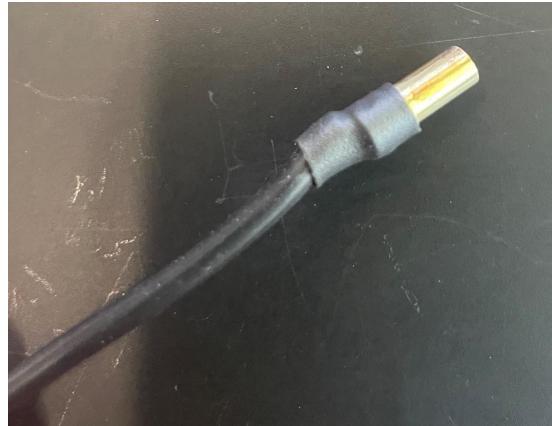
Soldered bullet connectors encased in heat shrink
